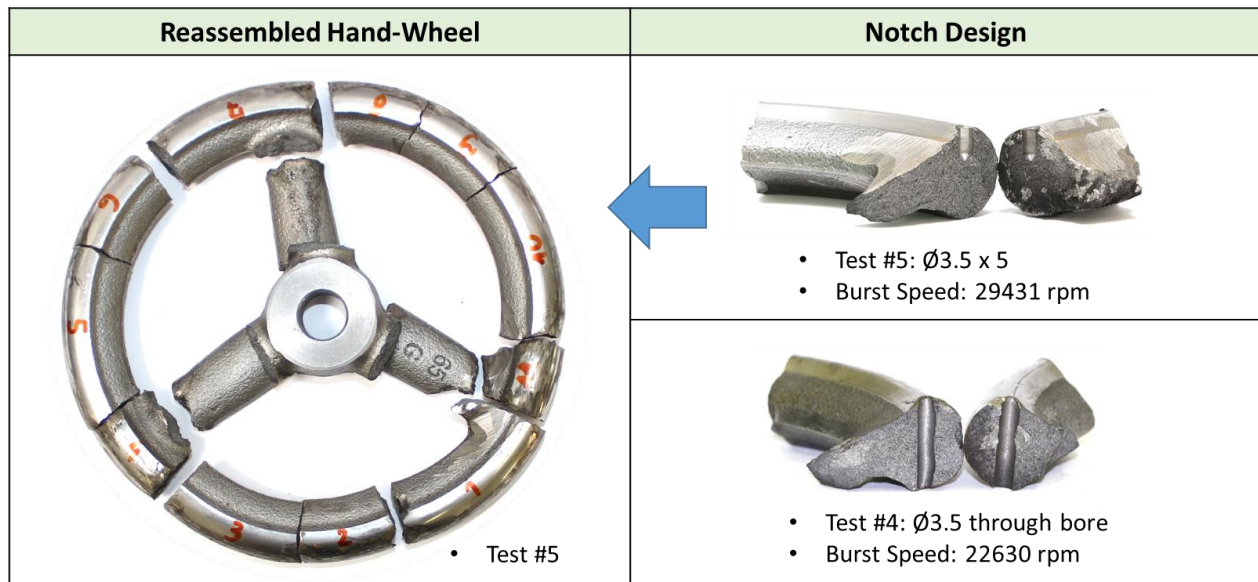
Reassembled cast iron hand wheel fractures after a burst test (left), Different notch-depth and the influenced burst speed (right)
